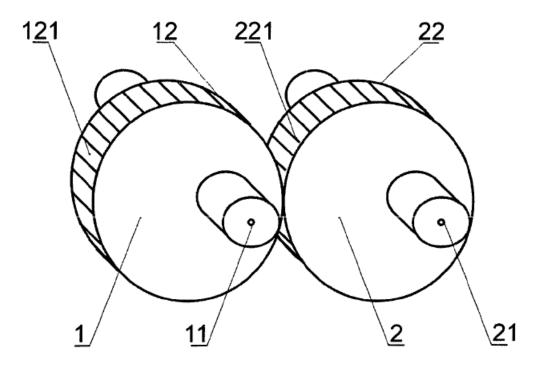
illustrates a toothed gearing including a pair of spur gears (1) and (2) which are eccentrically mounted.
